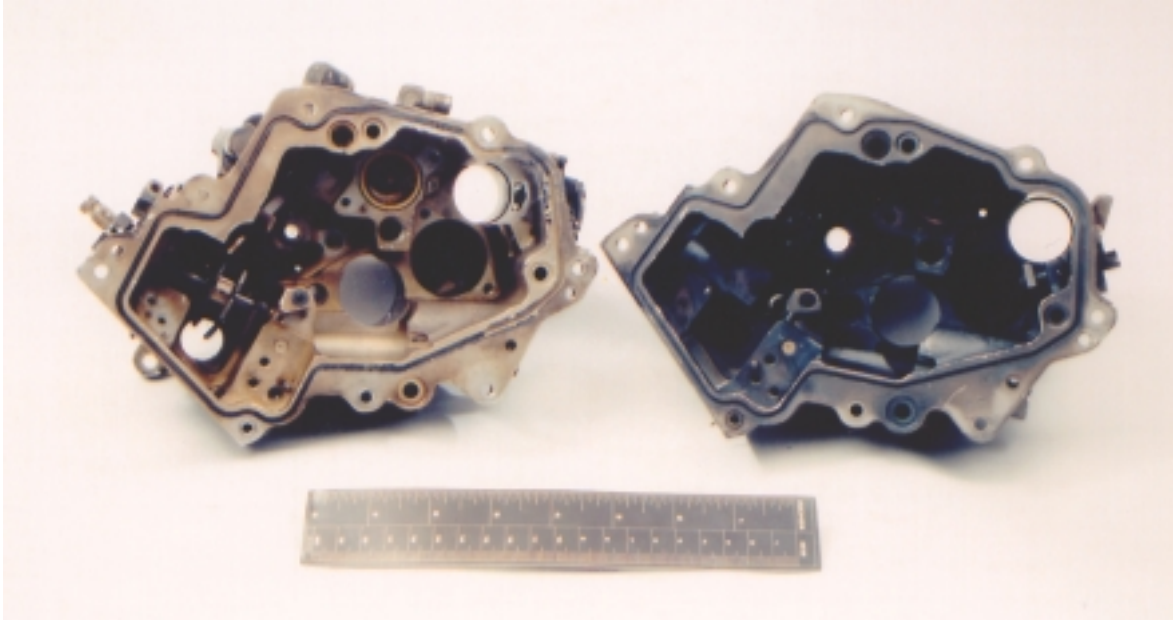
Inside Views of #2 Engine Fuel Control Unit (left) and #1 FCU (right) - Note the lack of fuel residues on #2 // Vues de l'intérieur du régulateur de carburant du moteur numéro 2 (à gauche) et de celui du moteur numéro 1 (à droite); remarquez l'absence de résidus de carburant dans le FCU du moteur numéro 2
